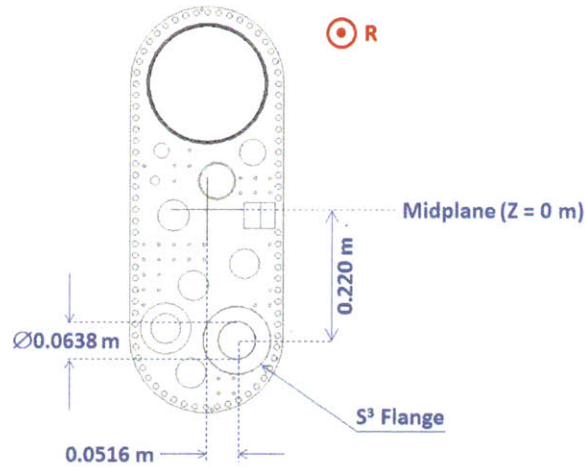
A view of the K-port horizontal flange from the air side. The location of the S³ flange opening is shown.
